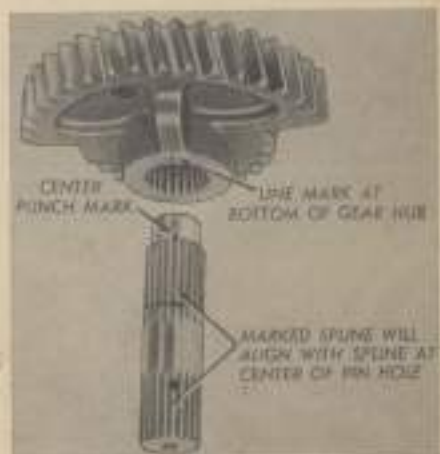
Align punch mark on steering shaft with line at bottom of steering gear hub as shown.
